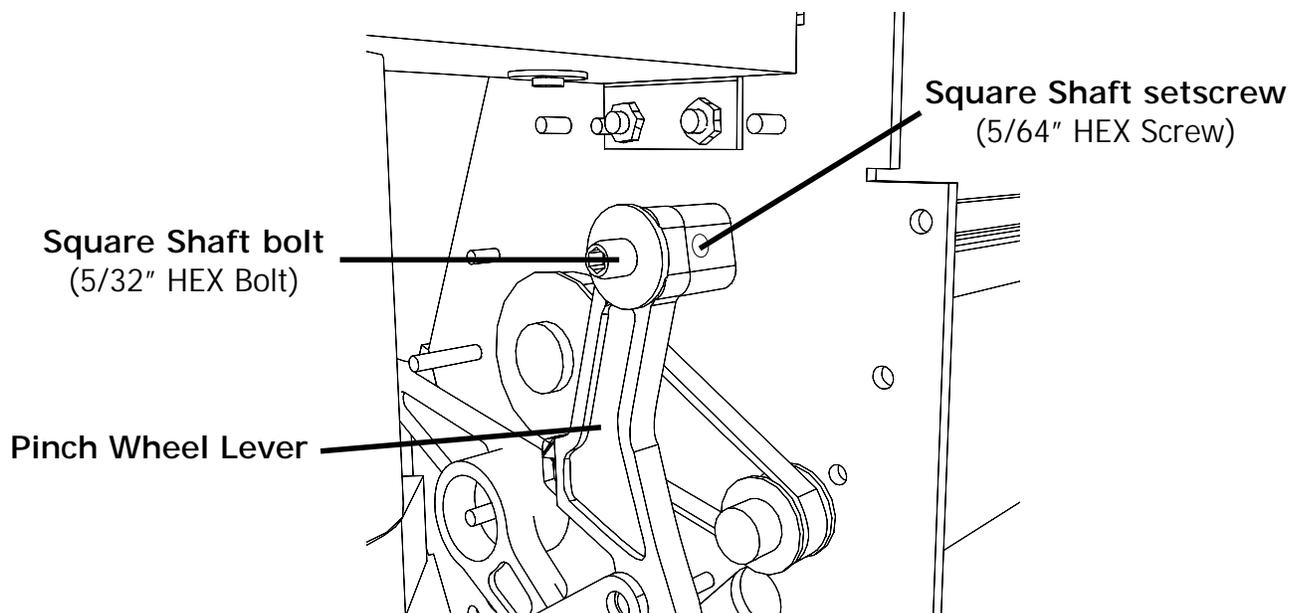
Machine with right side cover removed showing the pinch Wheel lever assembly
